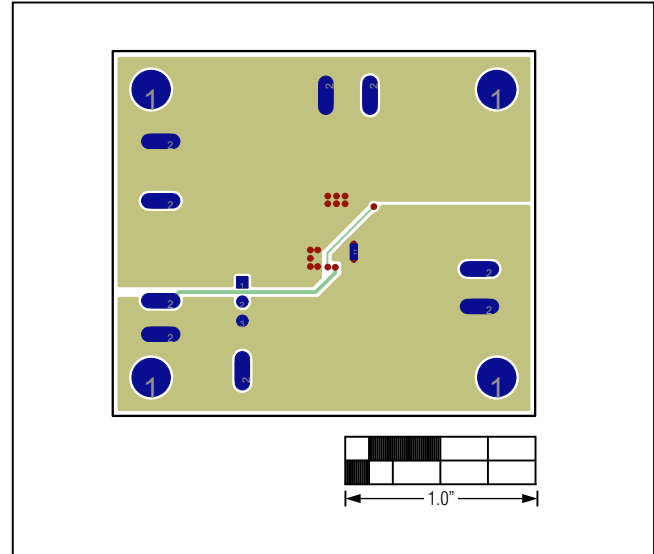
MAX17542G 3.3V Output EV Kit PCB Layout—Solder Side
